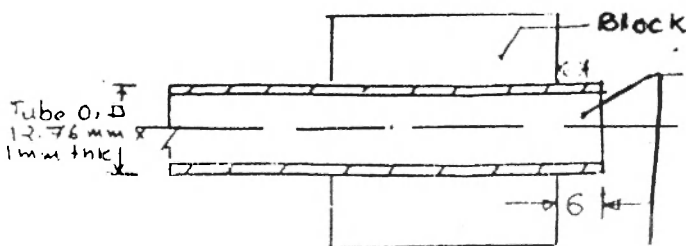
Joint configuration for welding SCTS baffle plate lattice tube
